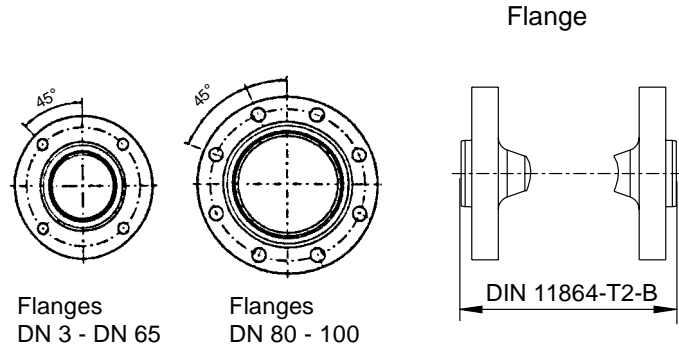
Dimensions, 1/8" - 4" / DN 3 to DN 100, Adapters for Variable Process Connections
